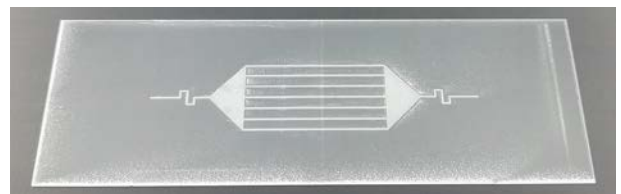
Structured (deep engraved) and cut-out sample on a dark surface prior any cleaning, outer dimension 75 x 25 mm
